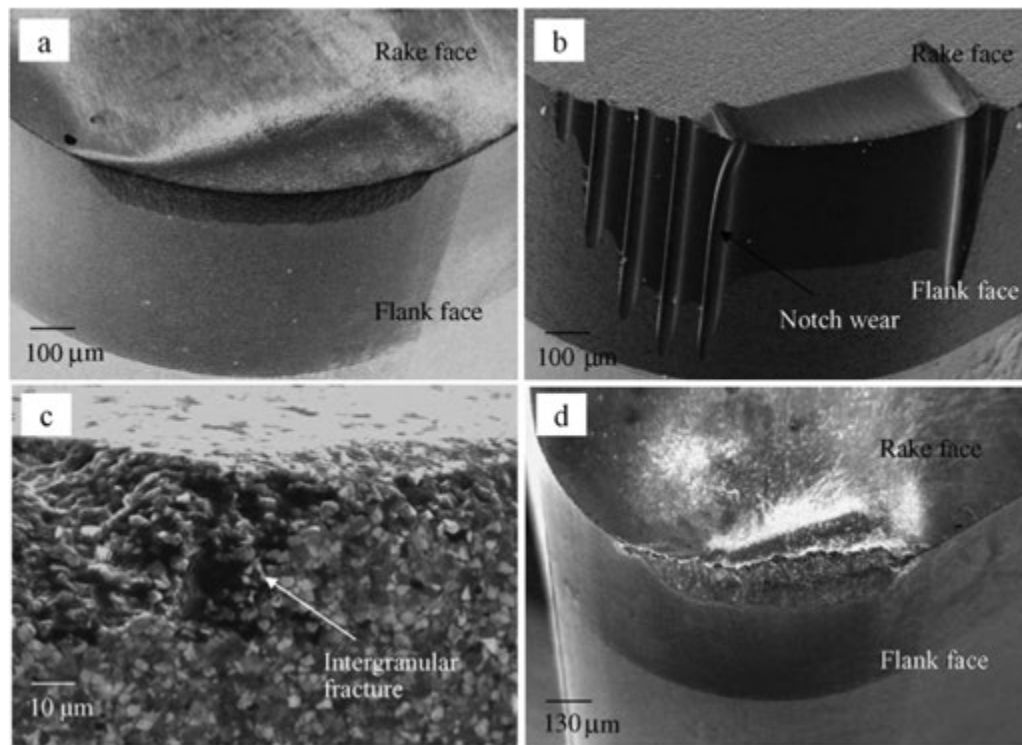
Typical defects on cutting tools: (a) rake and flank wear; (b) notching; (c) intergranular fracture; and (d) catastrophic fracture. Reproduced from Ding, X., Liew, W.Y.H., Liu, X.D., 2005. Evaluation of machining performance of MMC with PCBN and PCD tools. *Wear* 259, 1225–1234.
